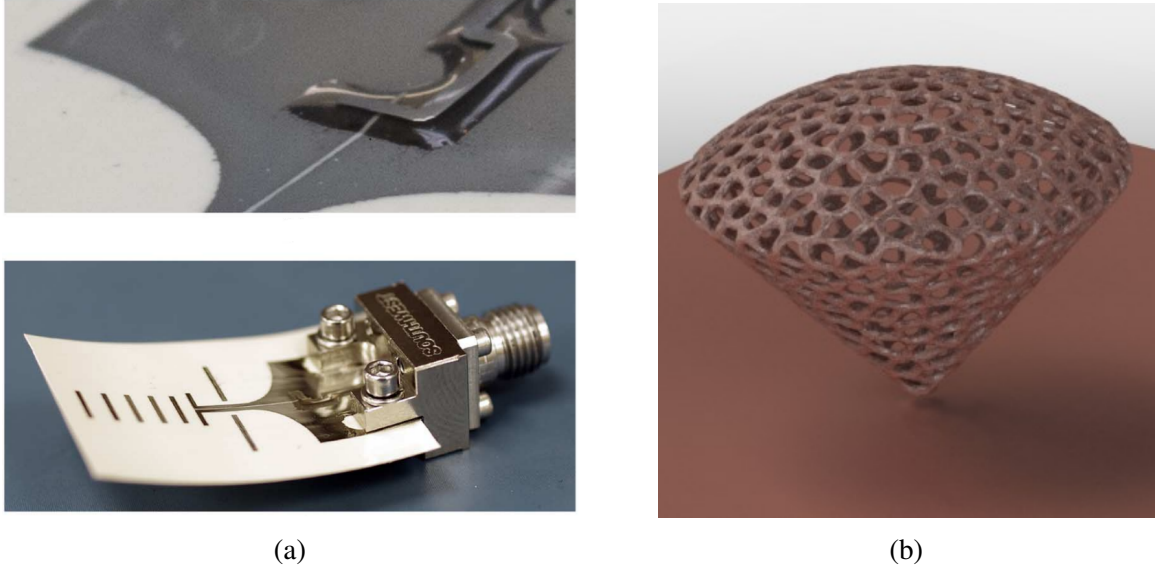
Additively manufactured antennas: (a) fully inkjet printed multi-layer Yagi-Uda antenna [56] (b) 3D printed Voronoi inverted feed dish antenna [58].
